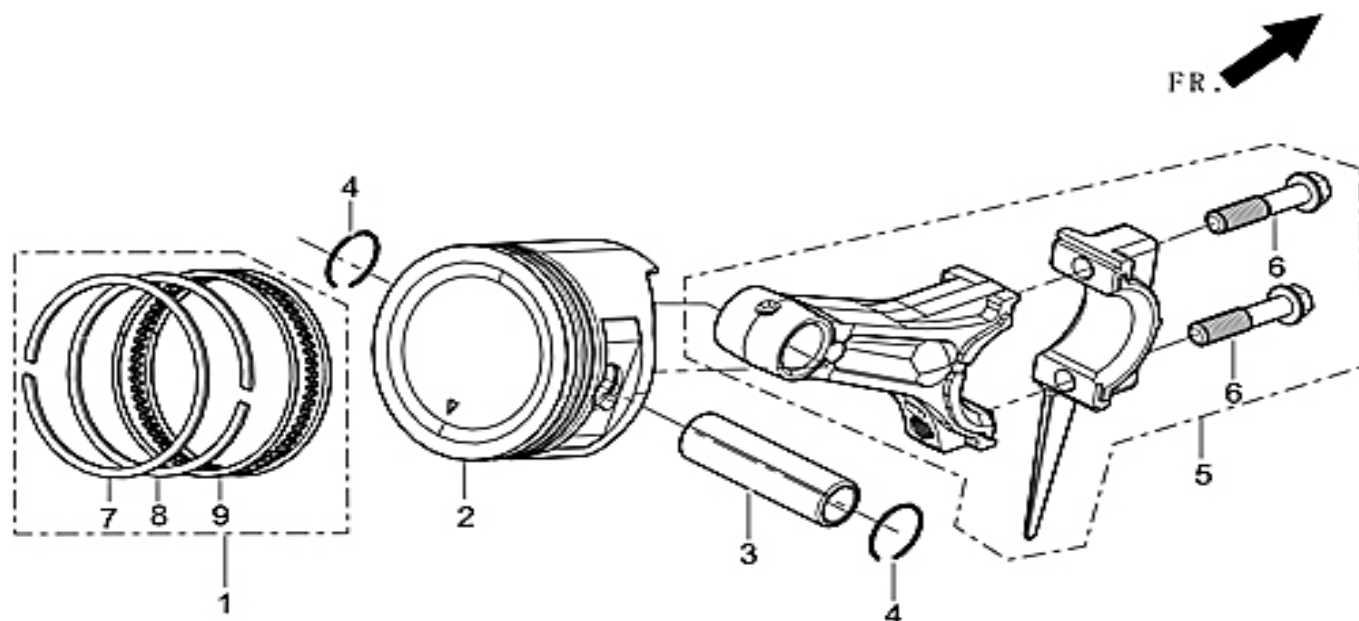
ROD, CRANKSHAFT CONNETING (E04)
